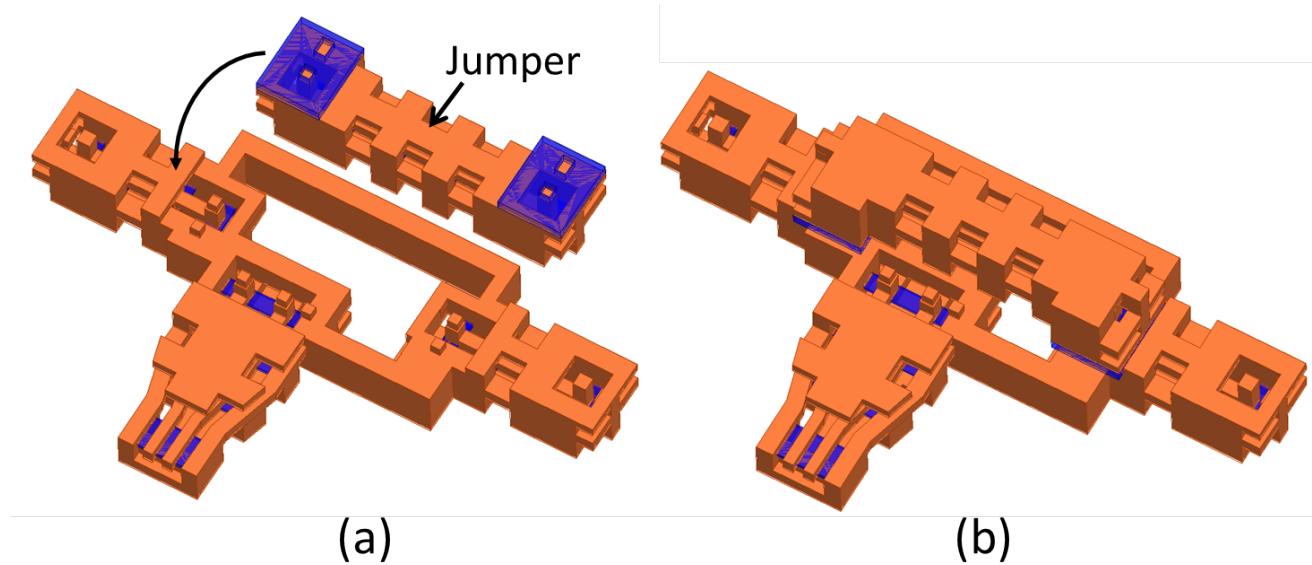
The passive, “through” liquid metal, flip chip jumper assembly, (a) showing both the PolyStrata frame and the PolyStrata jumper face up (b) a view of the final assembly.
